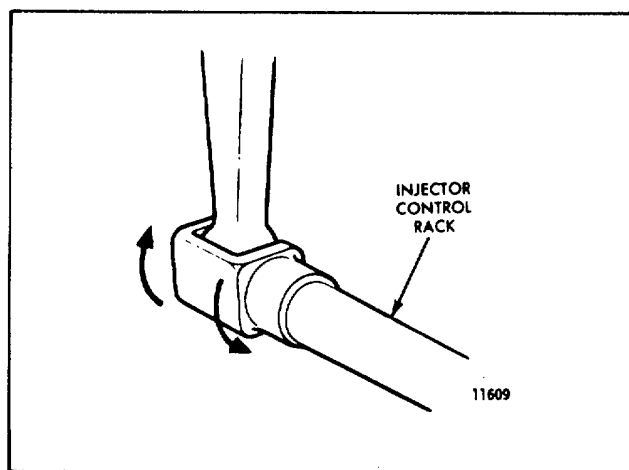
Checking Rotating Movement of Injector Control Rack
